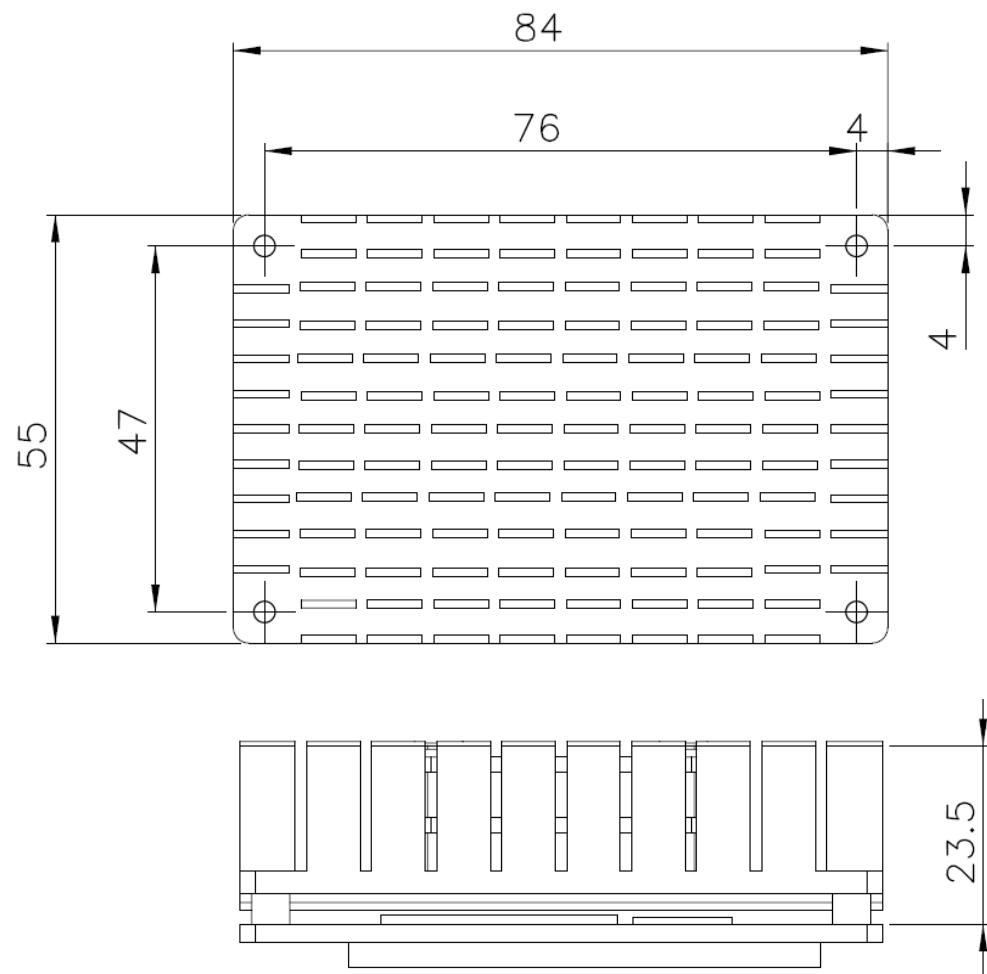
ICE-BT-T10 Heatsink Dimensions (mm)
